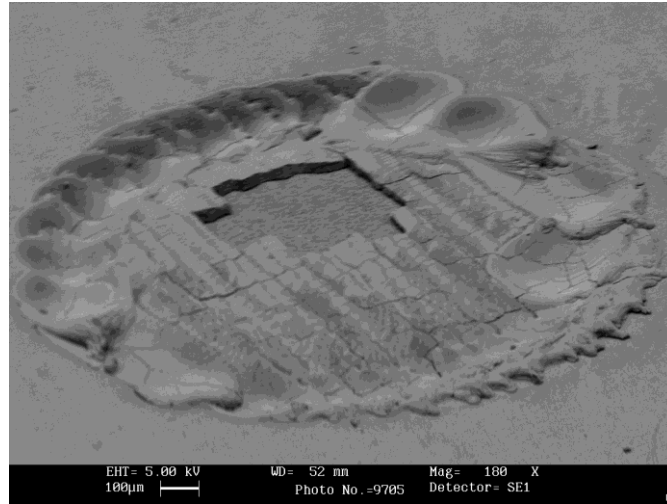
SEM image of a CO₂ laser machined 1.25mm diameter circle in an Al₂O₃ surface.
